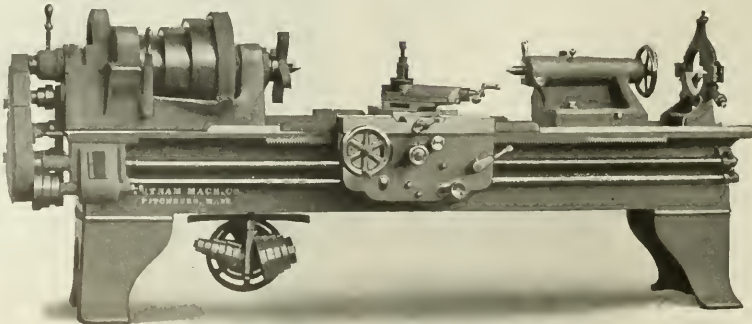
Putnam 22-inch Engine Lathe with Compound Rest, Tailstock and Back Rest
